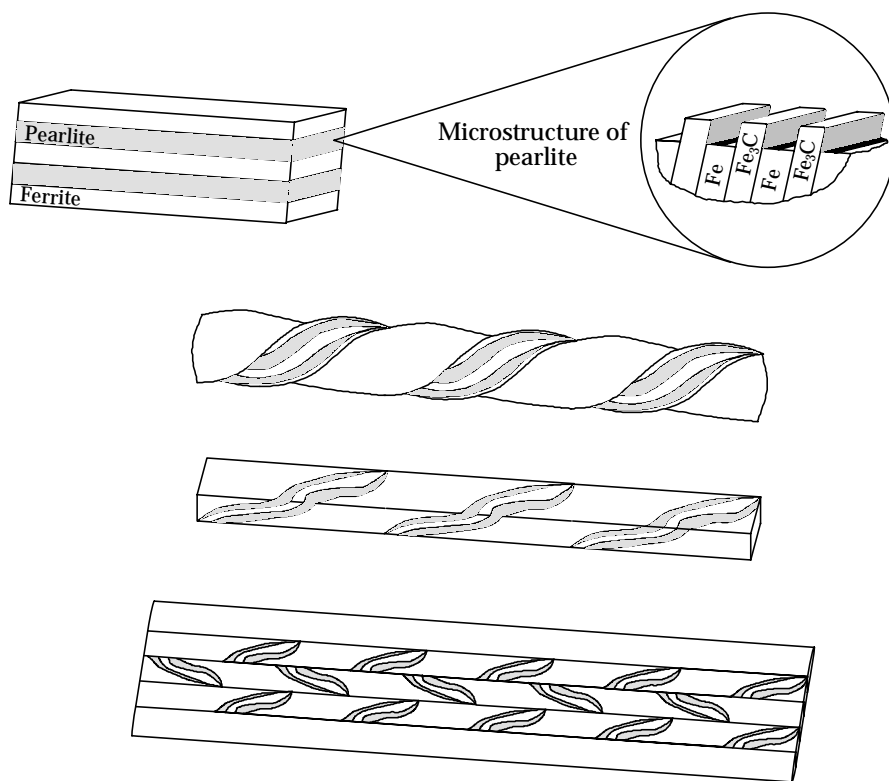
Schematic drawing of the welding of a Damascus steel plate.
